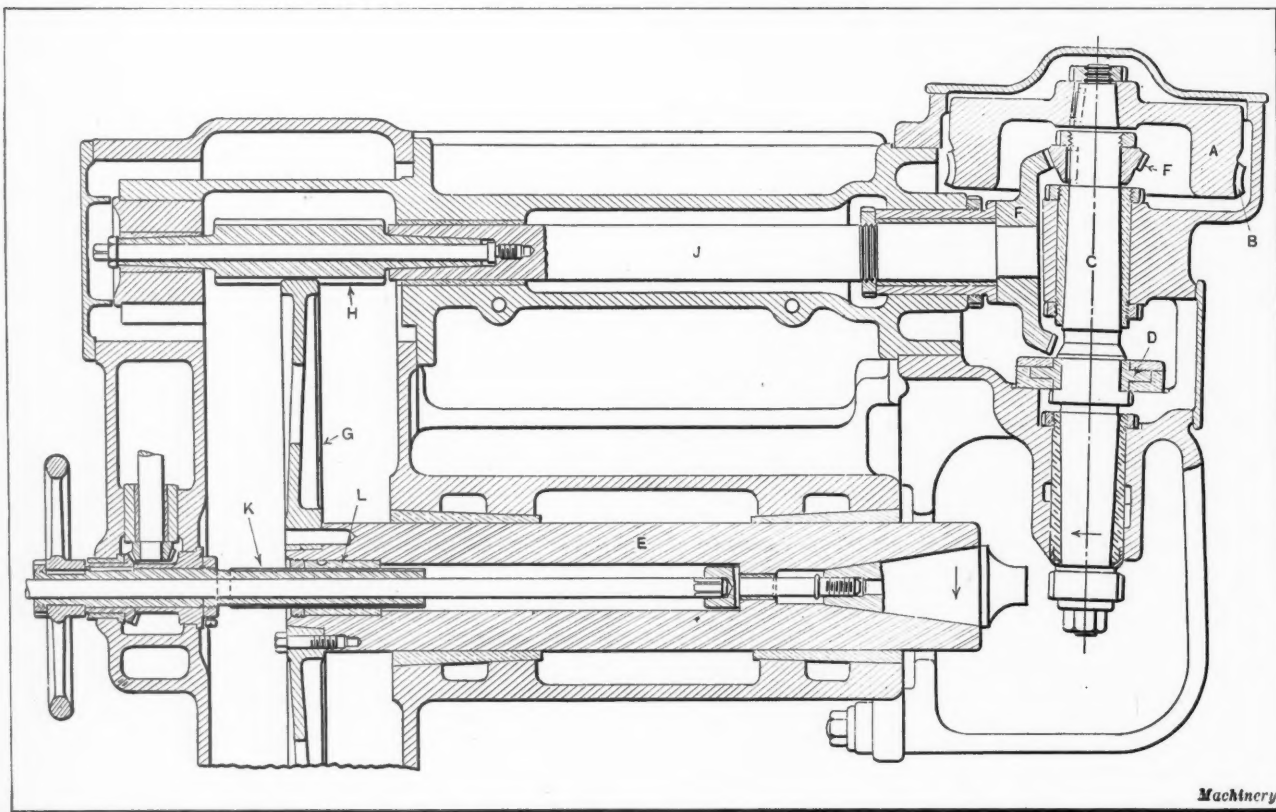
Sectional View, showing the Design of Hob and Work-spindles and Means employed to index and feed the Work-spindle
